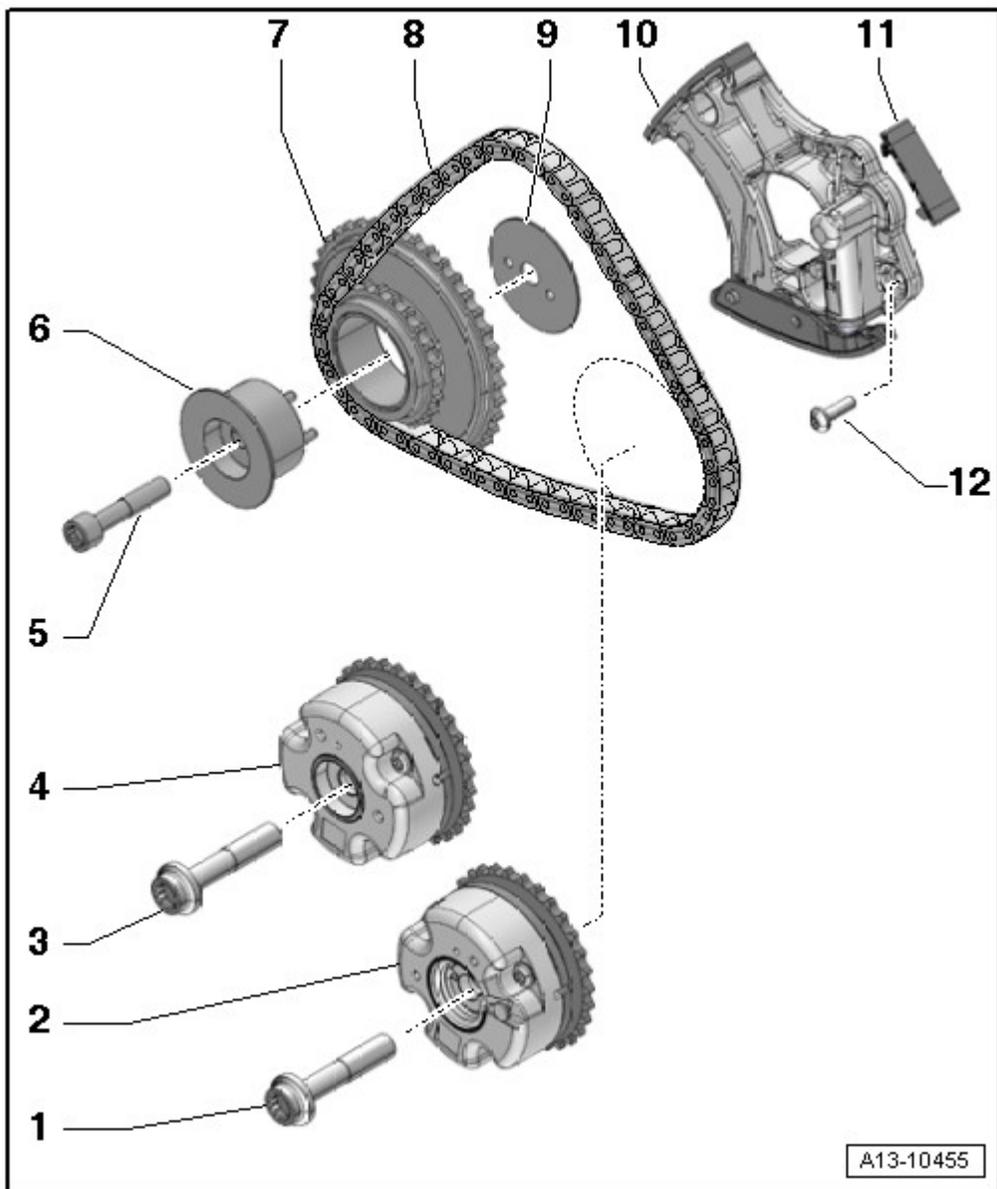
Identifying Left Camshaft Timing Chain Assembly
